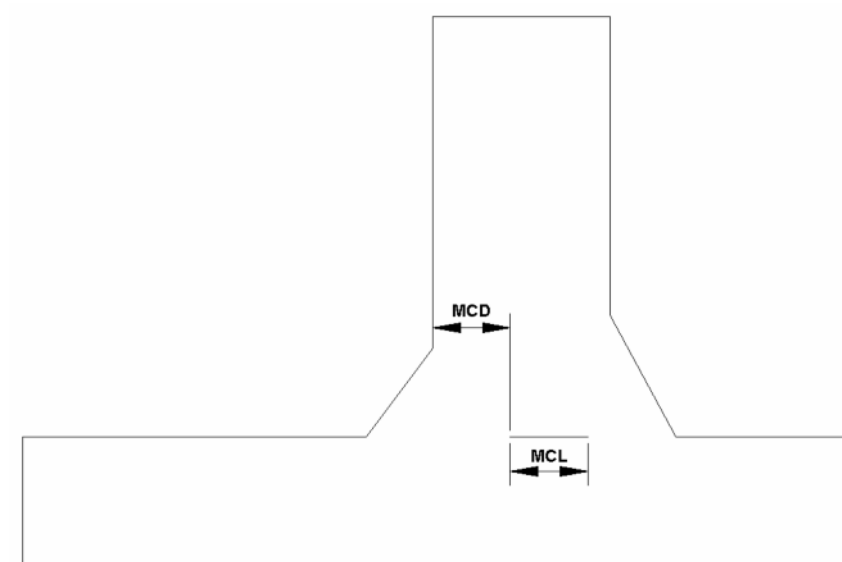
Two Sided Weld Penetration Depth Parameters
